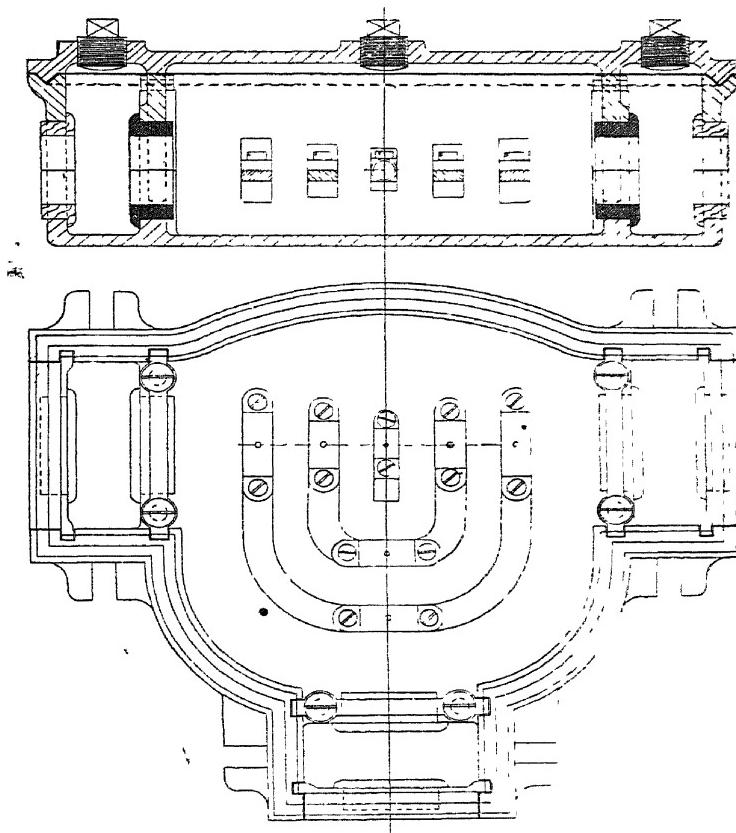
TRIPLE CONCENTRIC JOINT FITTINGS.
